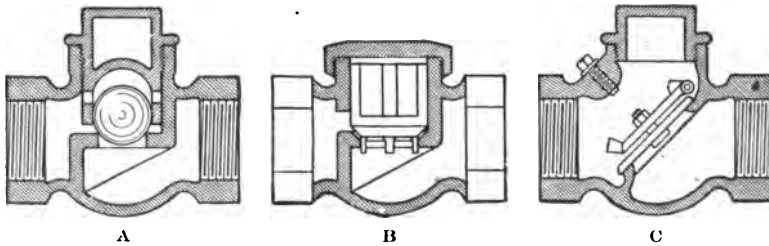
Types of Check-Valves. *A*-Ball-Valve; *B*-Flat Valve; *C*-Swinging Check-Valve.
